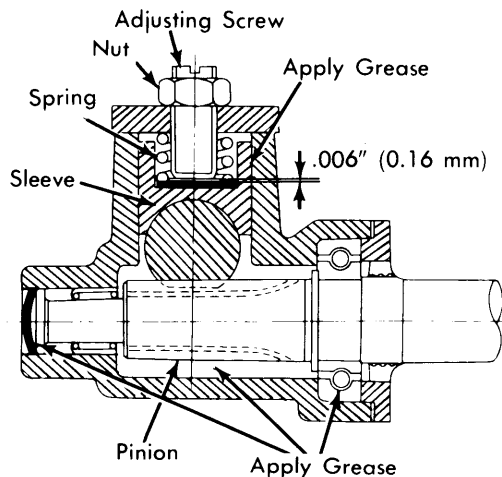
View Showing Lubrication Points and Backlash Adjustment
